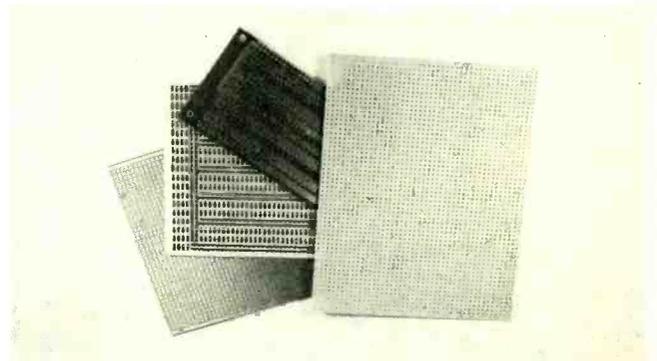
PERFORATED BOARDS are used with the cut/strip/hook and wire-wrap wiring methods. Also shown is a universal-type printed-circuit board.
